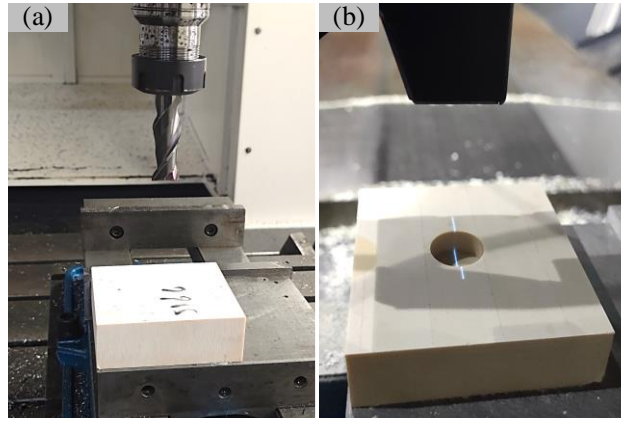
The process of machining and calibration: (a) Epoxy plate machining, (b) 3D laser profiler scanning
